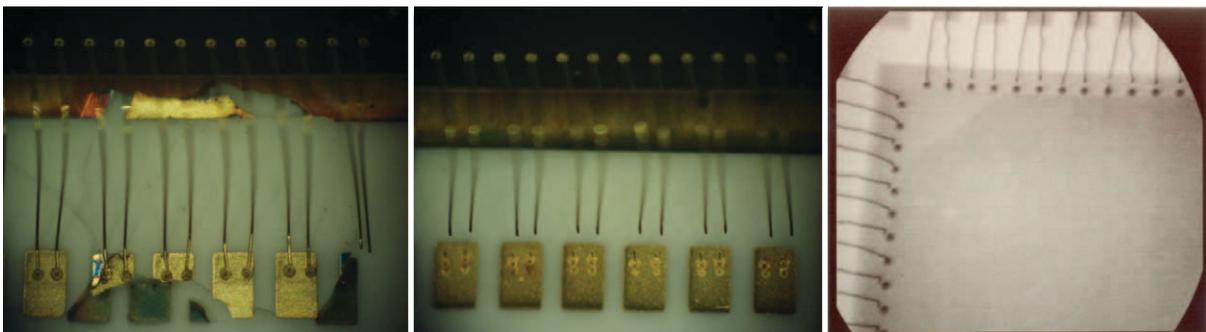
Wire-bond failure modes for temperature-cycled test coupons: pad lifting on a 99% alumina substrate (left), wire breakage at wedge bonds (center), and wire breakage near the ball bond (right).
